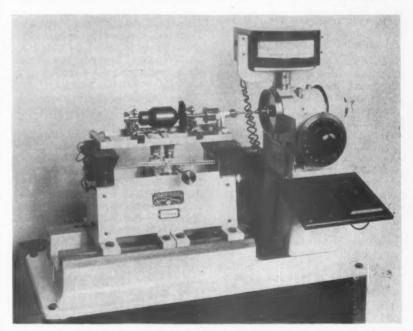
The "Vibro-Electric" self indicating type balancing machine for lighter weight parts.
